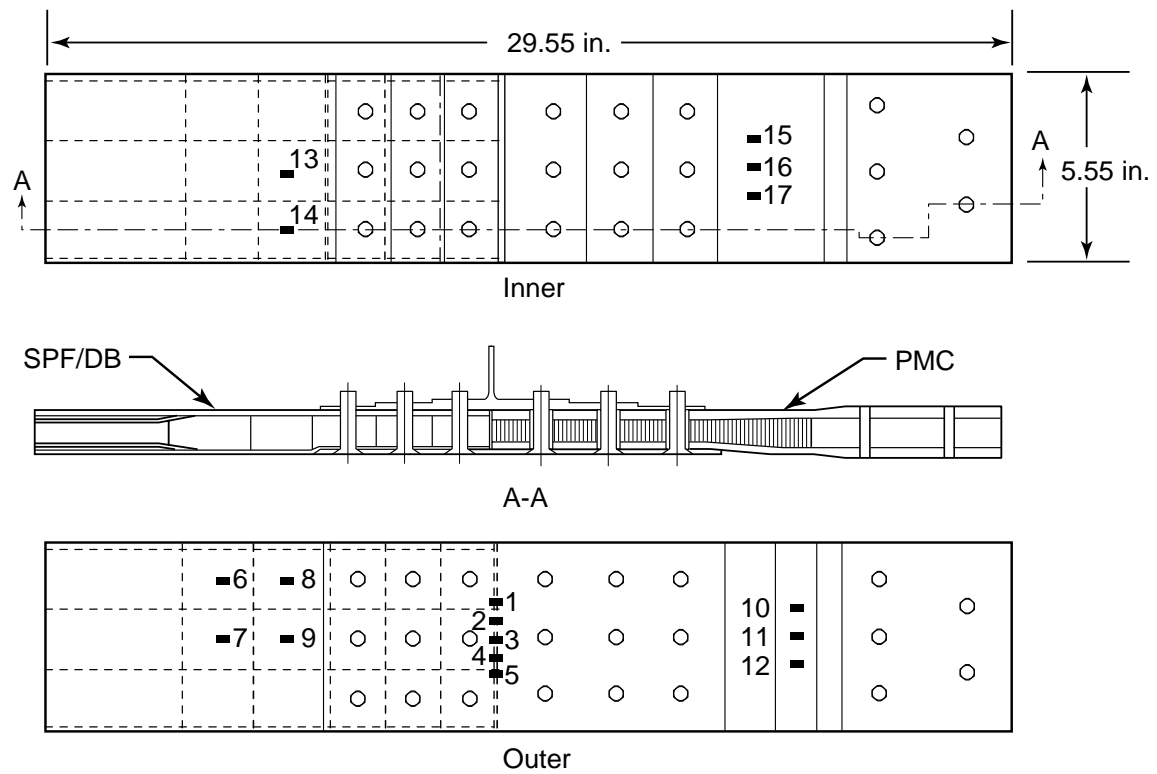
Schematic drawing of PMC to SPF/DB multi-row joint specimen including strain gauge locations.
